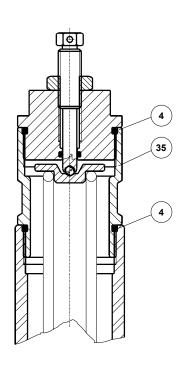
EZHSO Series Single Pilot Mounting Assembly
